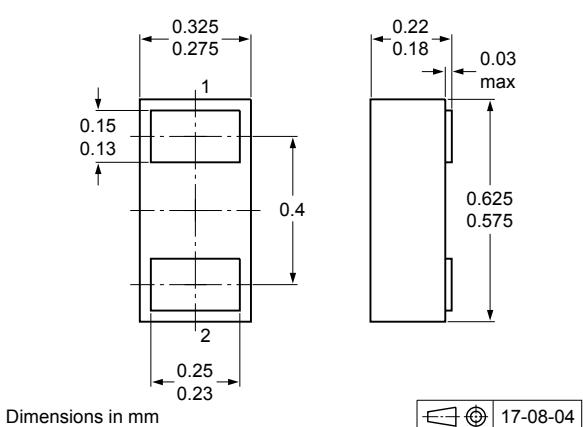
Package outline DSN0603B-2 (SOD962B)
